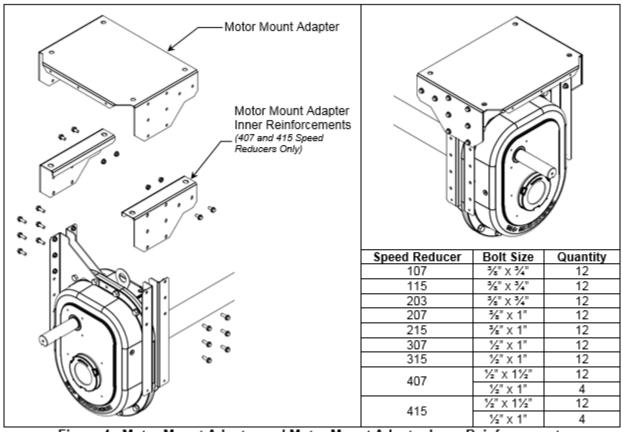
Motor Mount Adapter and Motor Mount Adapter Inner Reinforcements
